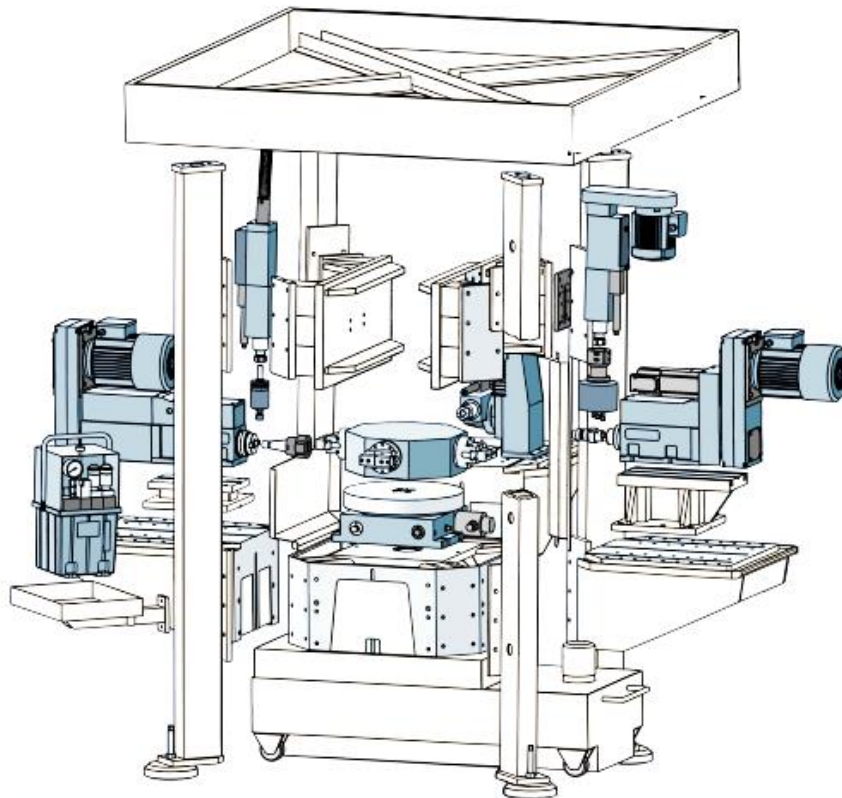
An SPM for producing parts with drilling-related operations [1].
